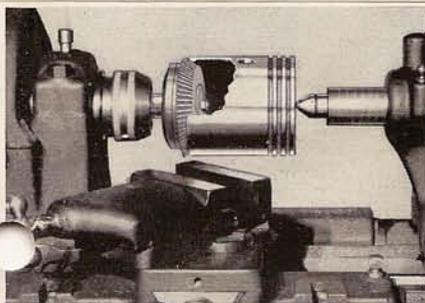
Reaming the Skirt of a Piston. Reamer is Held on Piston Adapter Shank.
